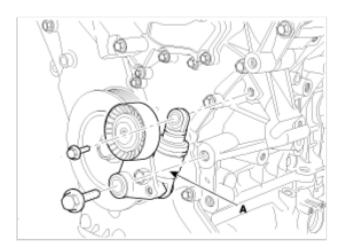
Identifying Drive Belt Auto Tensioner With Mounting Bolts
